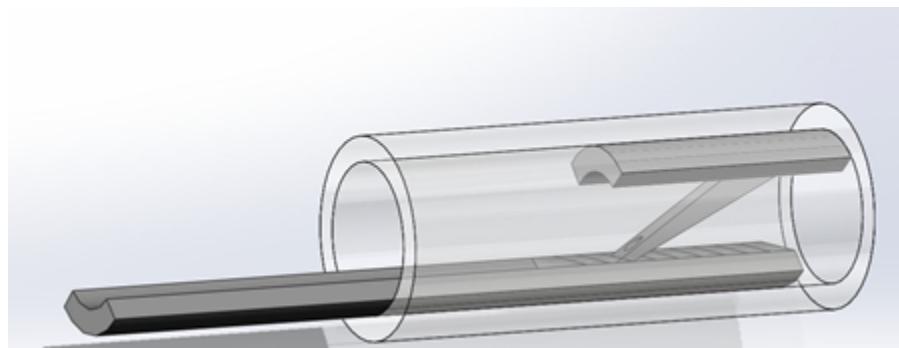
CAD model of elastomeric catheter joint with locking mechanism
